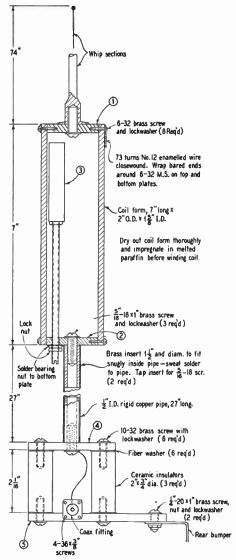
Detail sketch of the loading-coil form and mounting for the adjustable center-loaded mobile antenna. (1) and (2) are brass end plates. (3) is the tuning slug. (4) is the brass mounting plate. (5) is a mounting bracket made of aluminum.
